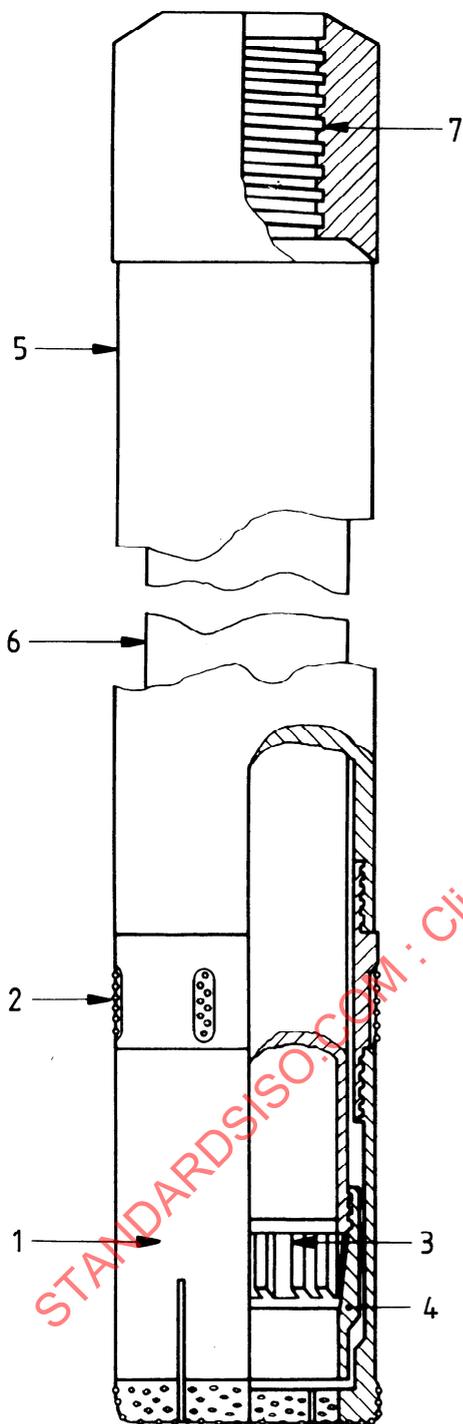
"WG" design double-tube core barrel — Head (see table 35)
